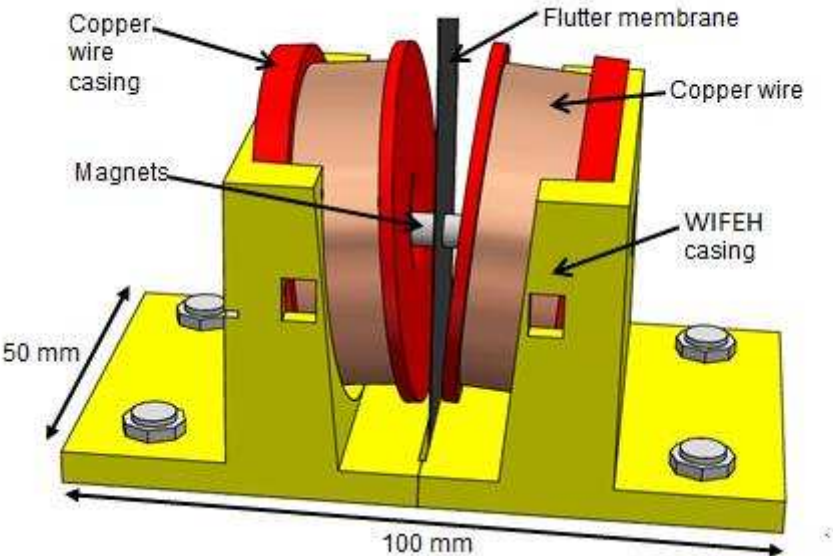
Schematic and dimensions of 3D-printed WIFEH prototype
